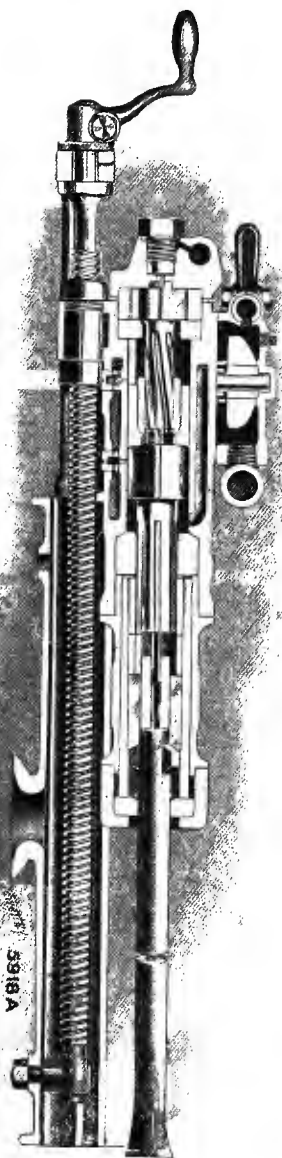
Sectional view of Leynor-Ingersoll drill, showing mechanism.
